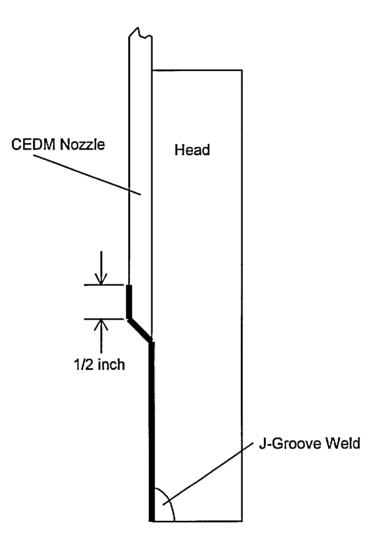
PSL1 and PSL2 CEDM Temper Bead Weld Repair, PT Coverage Prior to Welding
